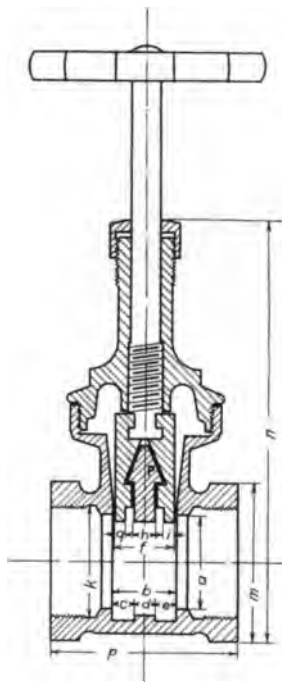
Section Through Small Crane Gate Valves. Sizes Tested $\frac{1}{2}$, $\frac{3}{4}$, 1, and 2-inch Diameter. Dimensions Given in Table 1, Page 24.
